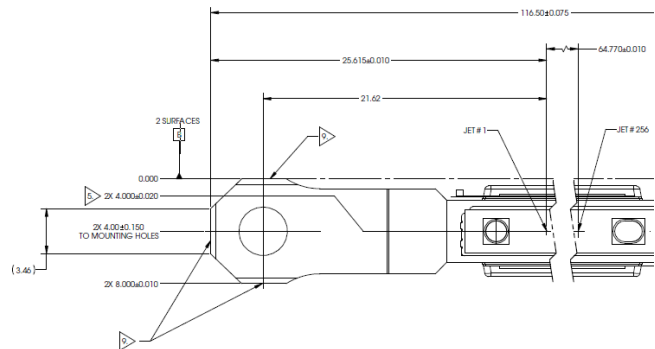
Sapphire Interface control drawing with mechanical tolerances.
